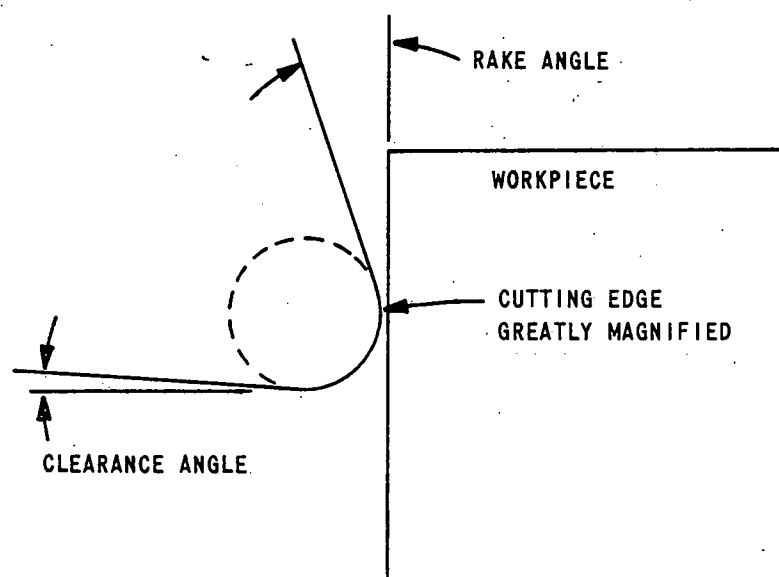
Cutting Edge Producing Indentation as It Enters Workpiece
